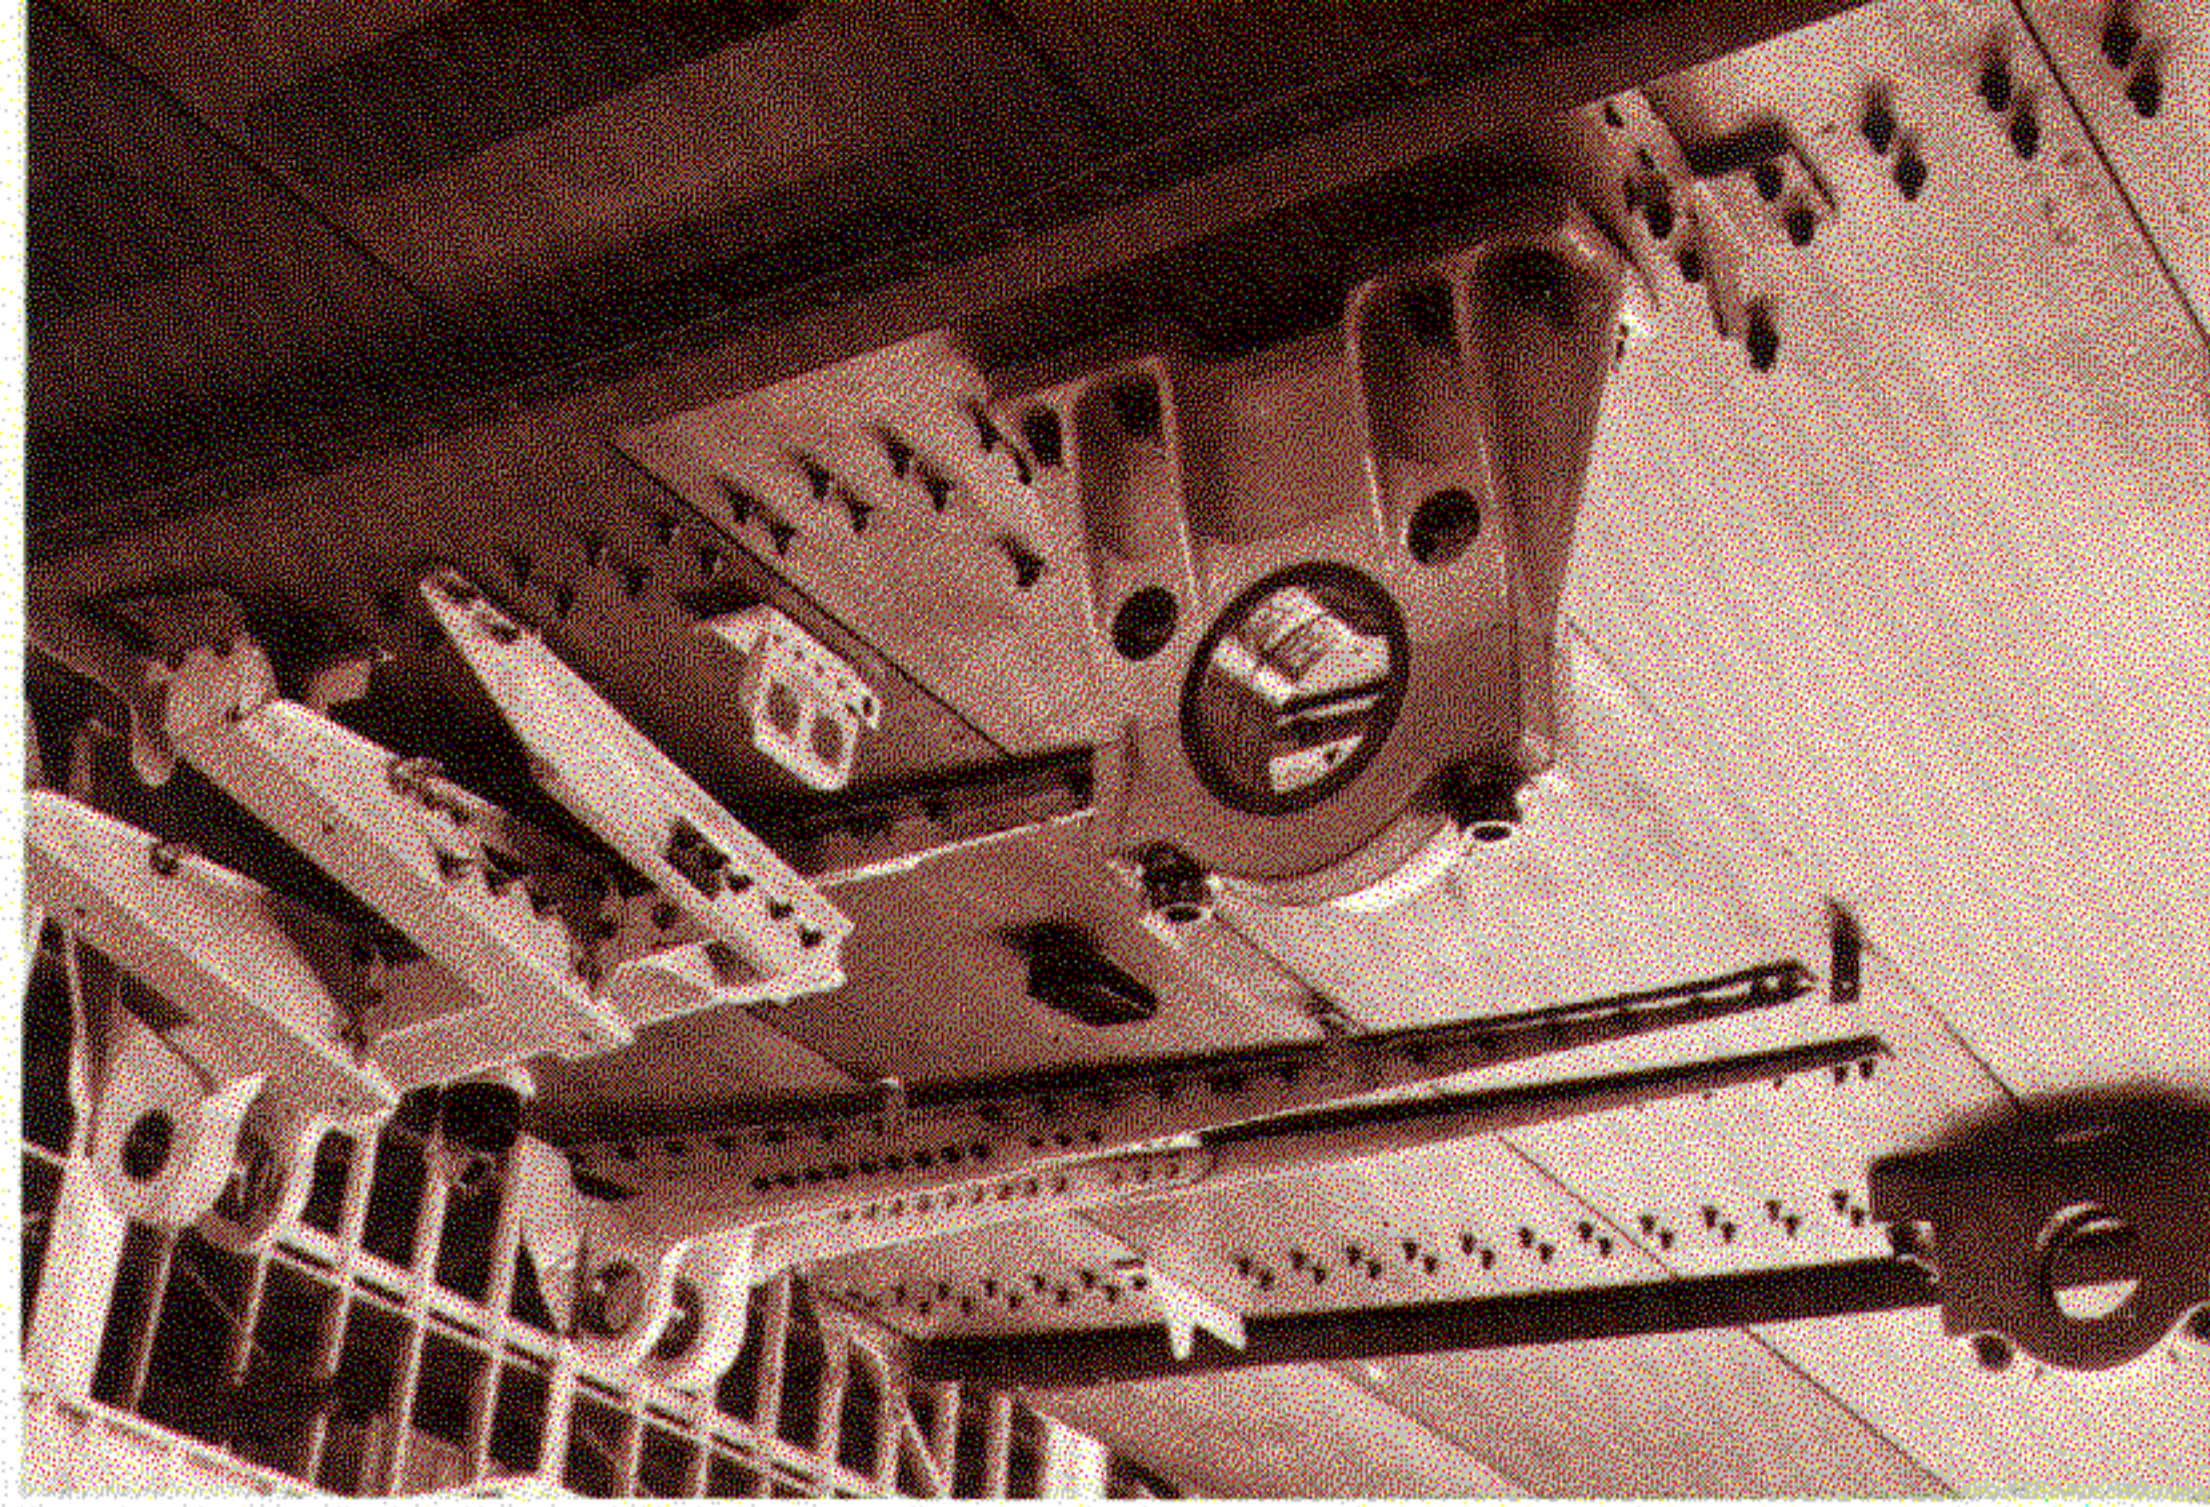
Landing Gear Attachment Structure is Faying Surface Sealed before Installation
